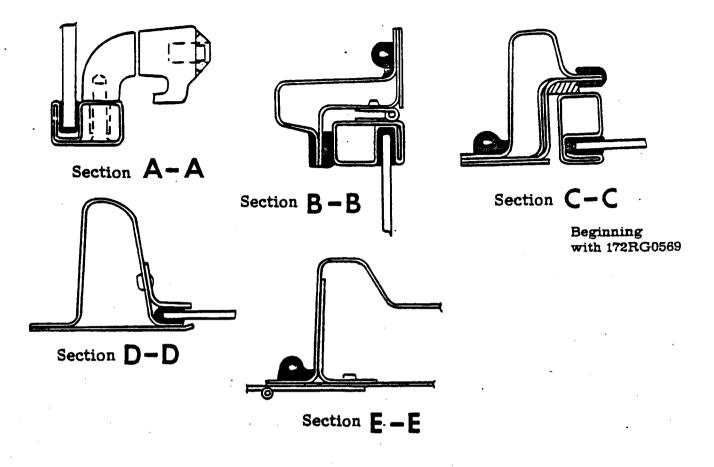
Left Cabin Door Assembly (Sheet 2 of 2)
